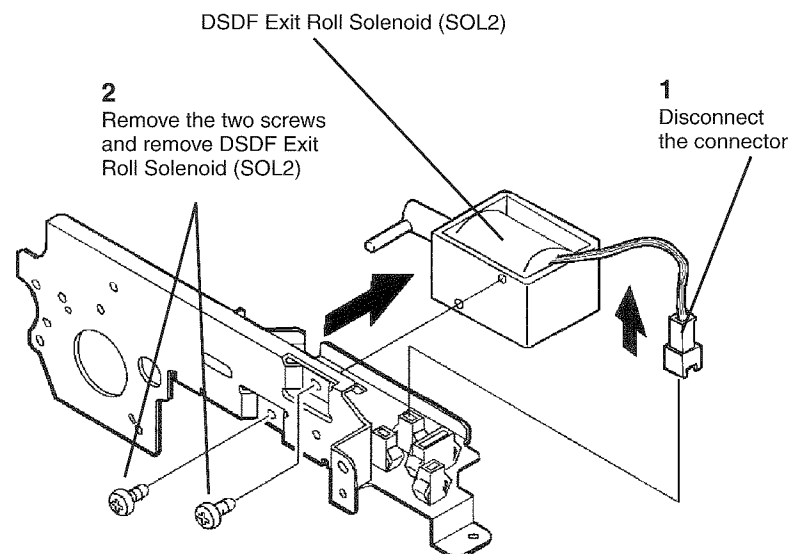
Removing the Exit Roll Solenoid (SOL2)
